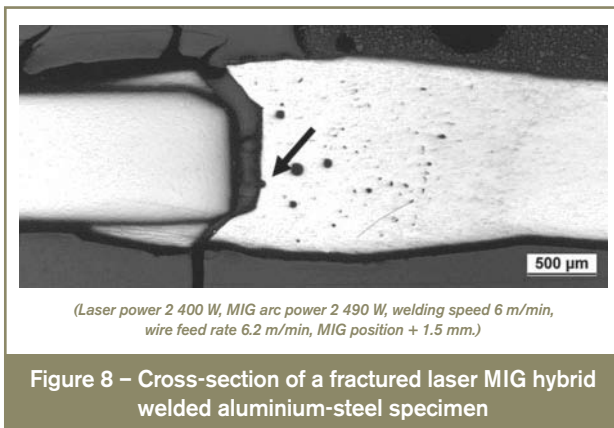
Cross-section of a fractured laser MIG hybrid welded aluminium-steel specimen
